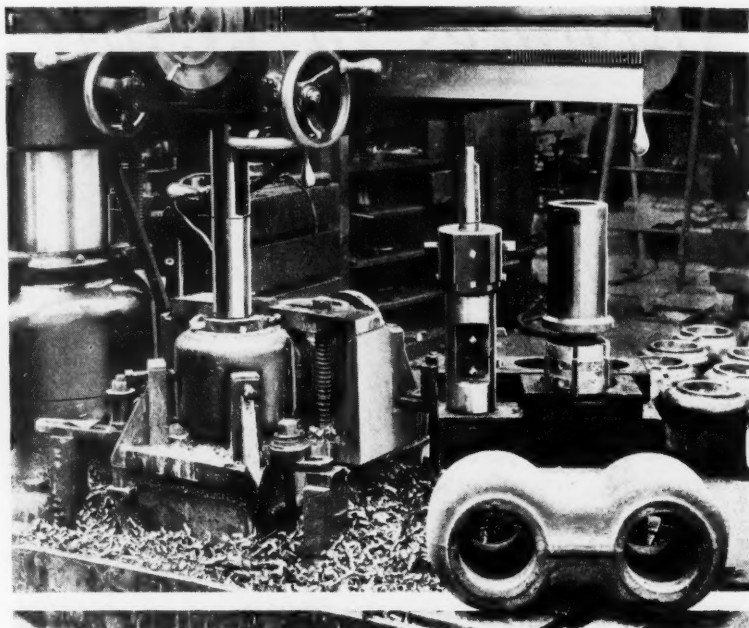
An American Tool Works 4-foot Radial Drill Rough- and Finish- boring and End-facing Two 16-inch Holes in a Heavy Casting in 57 Minutes
